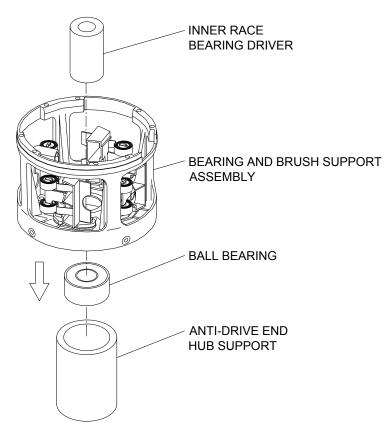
Removing the Anti-Drive End Ball Bearing
